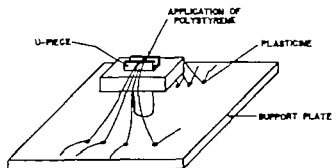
Schematic drawing of the wire assembly arrangement.
